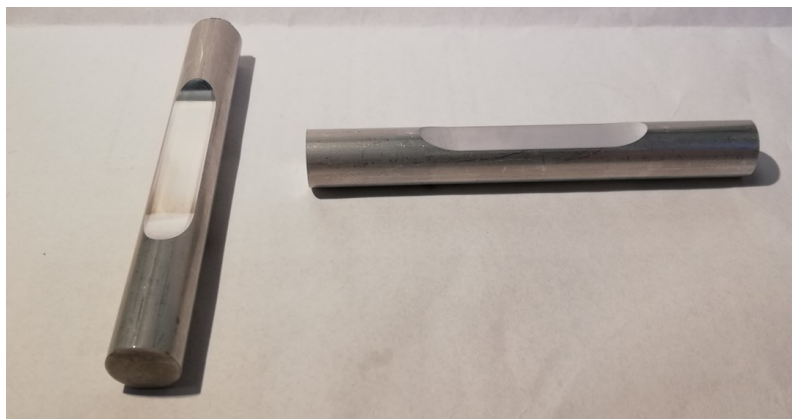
Image of the machined tensile specimens of a co-extruded rod.
